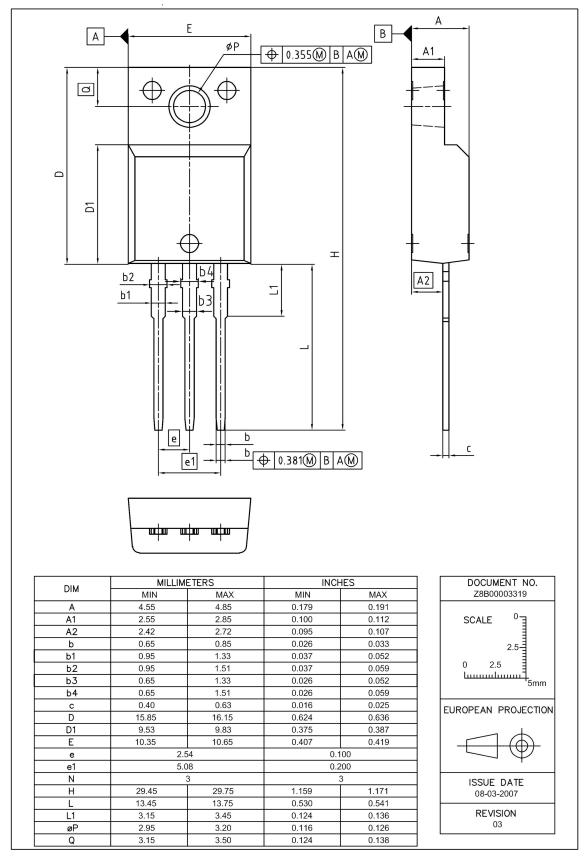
Outline PG-TO 220 FullPAK, dimensions in mm/inches
